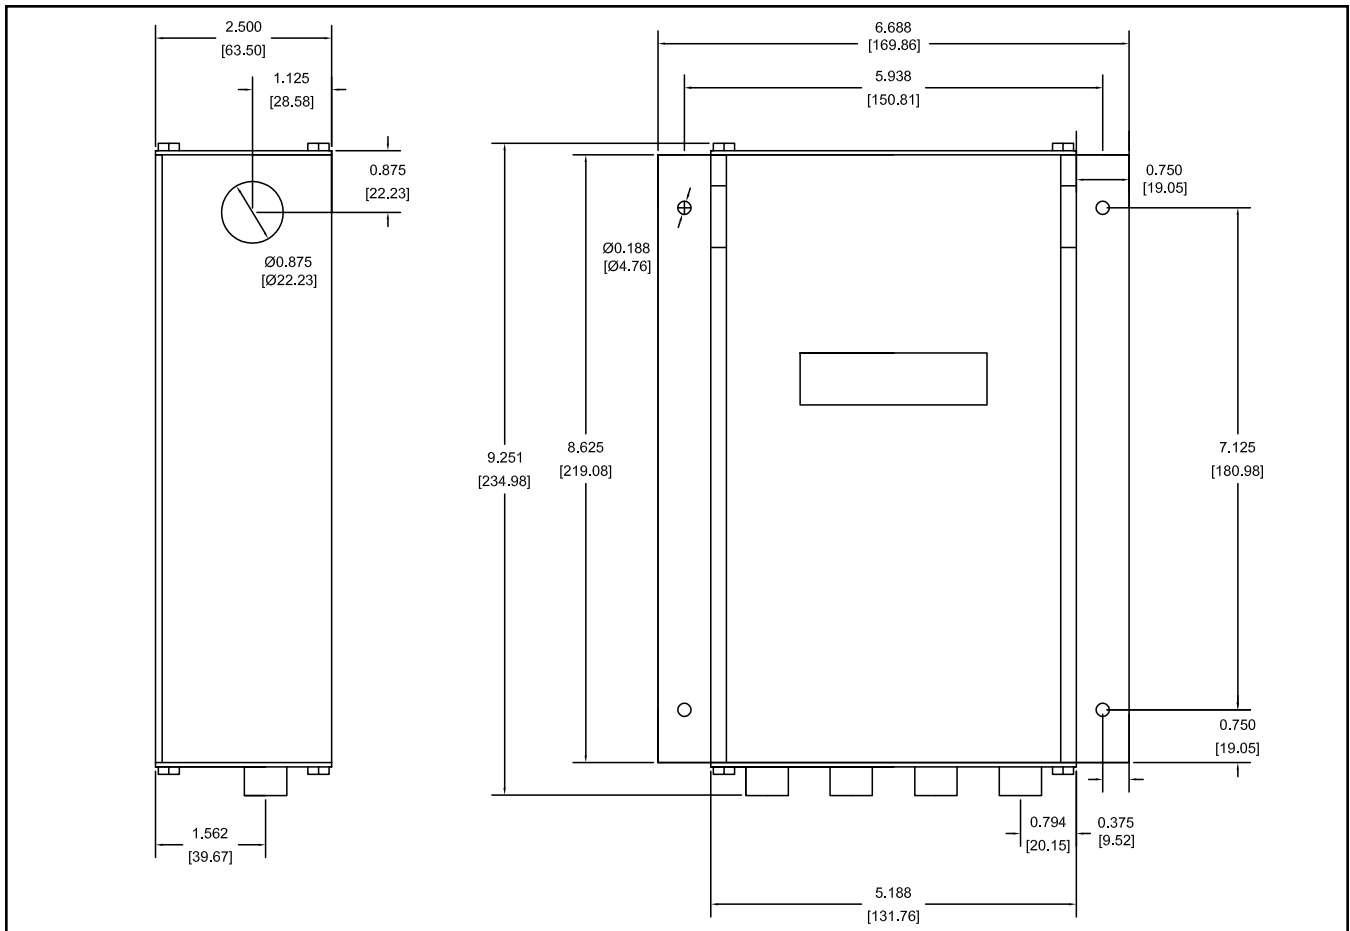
GTA116 Transmitter Mechanical Detail Drawing
